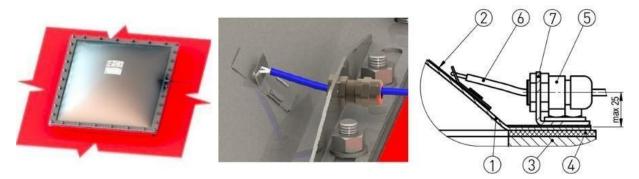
Installing the G1 indicator cable in the bushing in the holder
